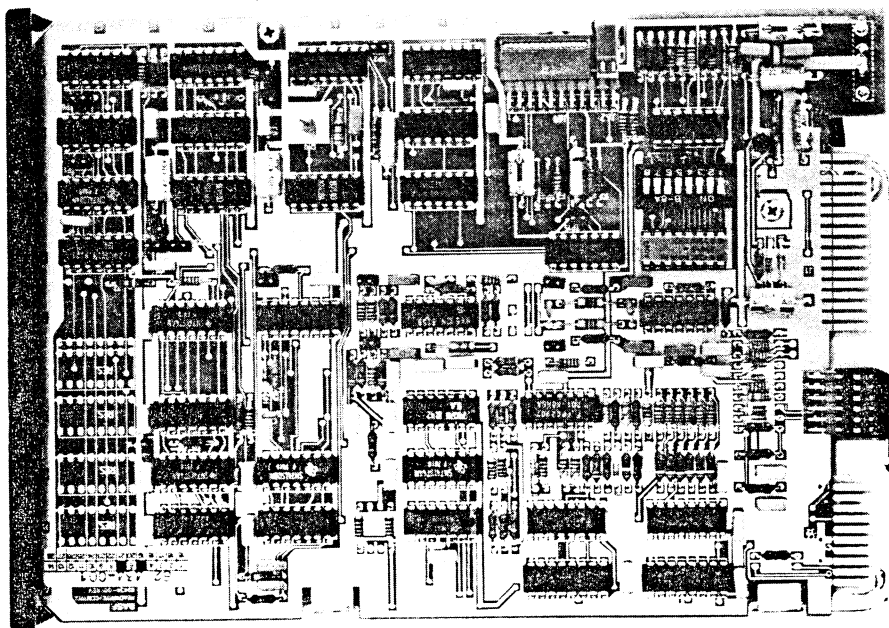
1 : BASF 6180 5.25" FIXED DISK DRIVE (TOP VIEW)
